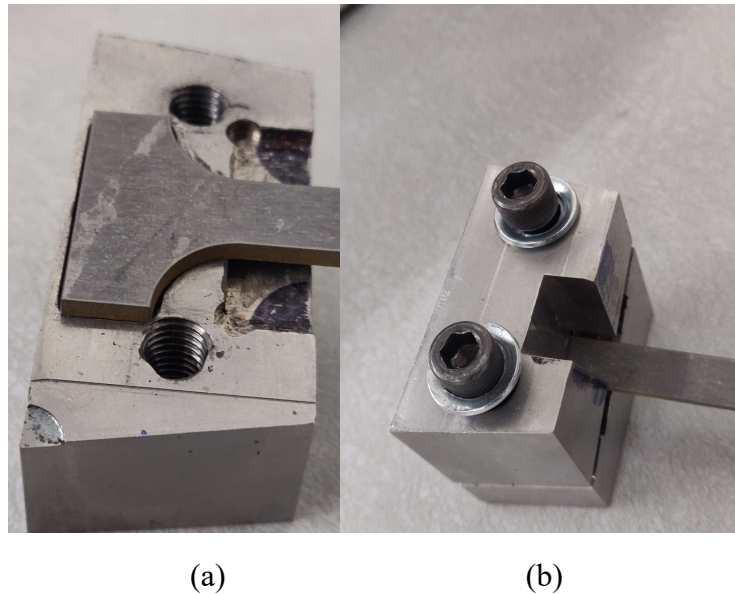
(a) shows the specimen seated in the machined recess in the grips and (b) shows the top part of the grip that clamps onto the specimen and holds it in place. The grips angle the specimen to match the viewing angle of the Gleeble window. A notch was machined out of the grips to allow a view of the entire gauge length
